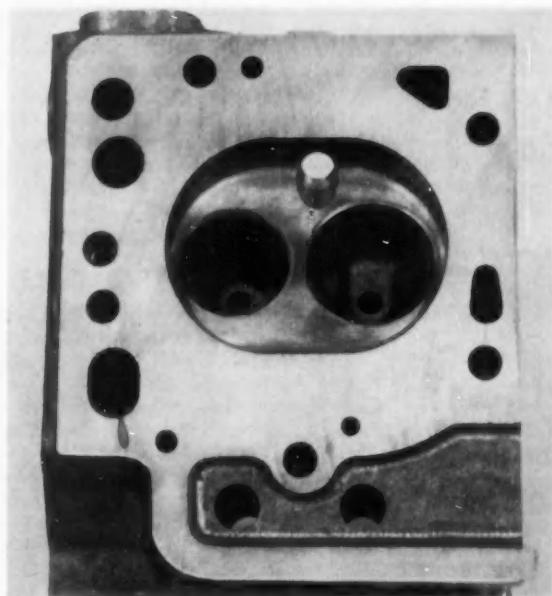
Completely machined combustion chamber has an elliptical shape in the plan view. Valves are side-by-side.
